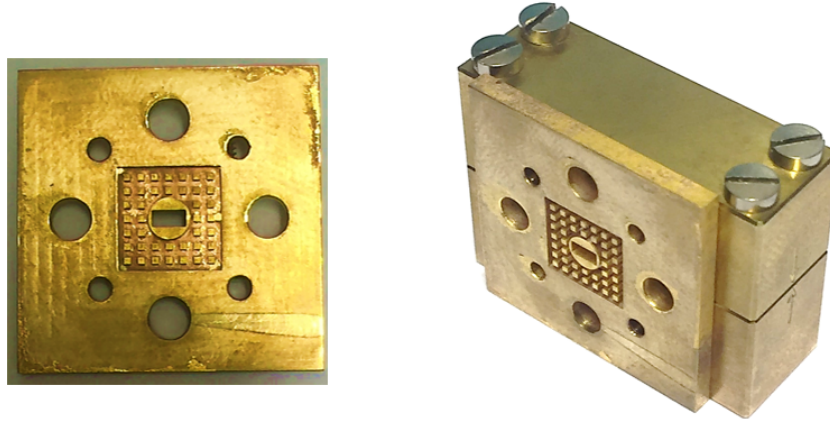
Contactless pin waveguide flange operating at W-band and the arrangement of the pin flange with the prototype to be measured
